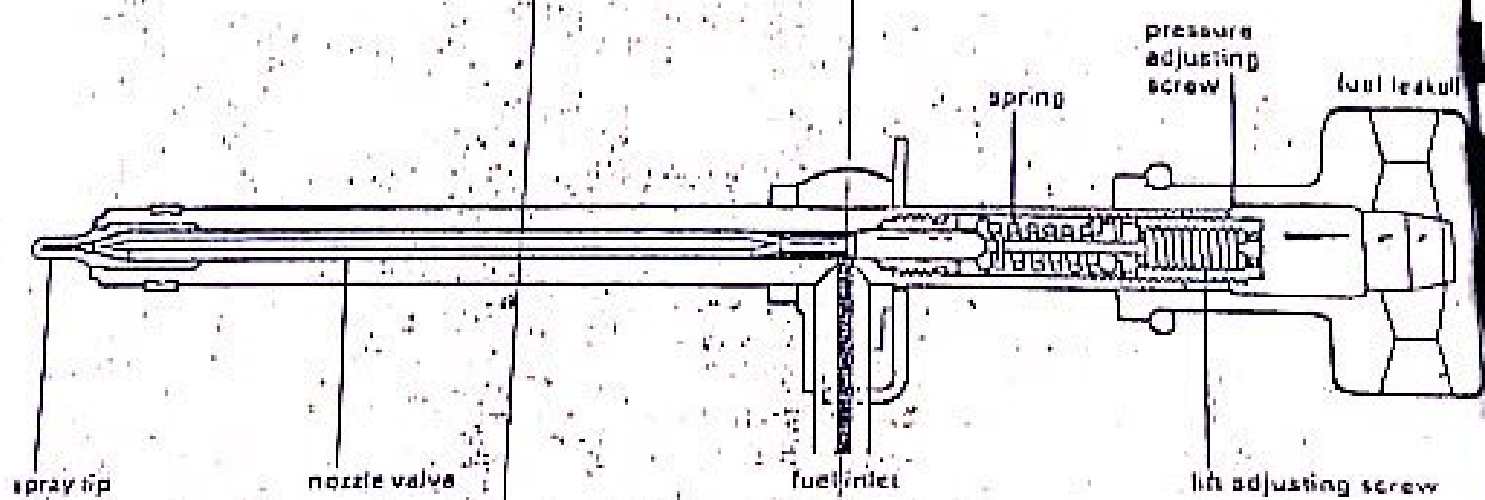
Cross-sectional view of a diesel fuel injection nozzle
